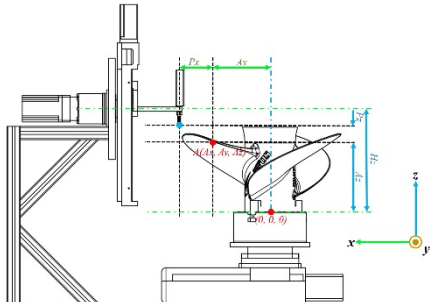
Side view of the propeller machining system (including x-axis and z-axis geometrical parameters).
